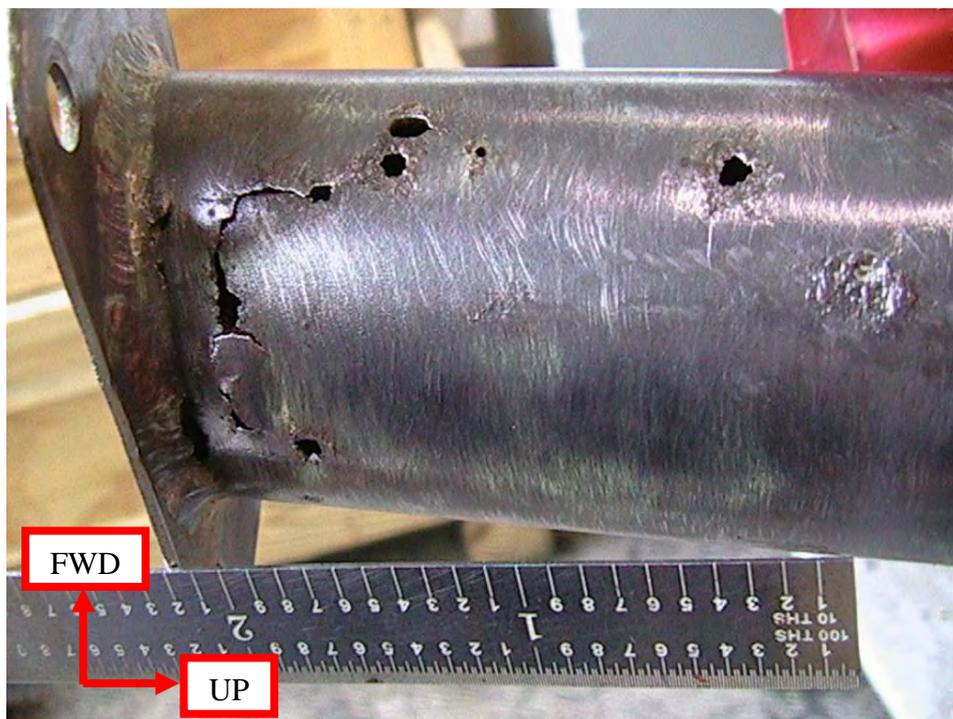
Corrosion on the Rudder Torque Tube After Paint Removal FS 342.25, WL 20, and BL 0
